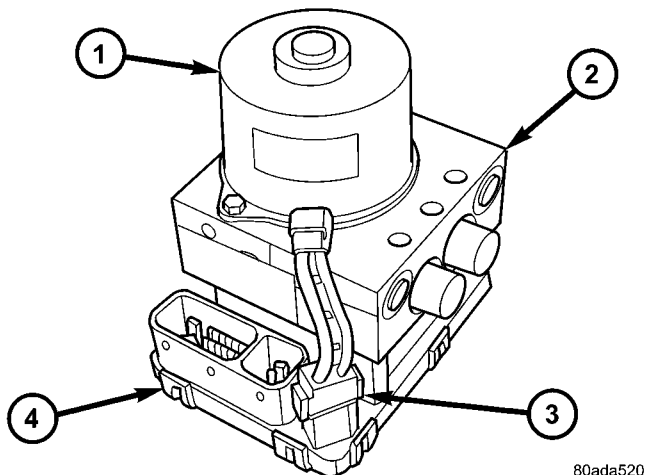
INTEGRATED CONTROL UNIT (ICU)
